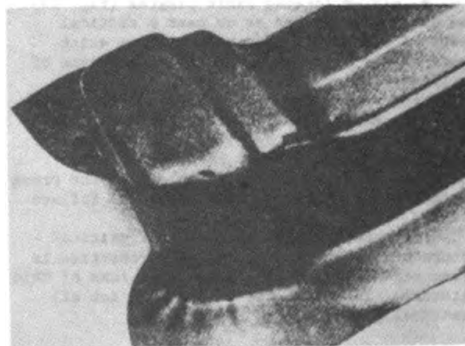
1979 Eldorado bumper draw splits with out-of-spec. G. M. 6187-M steel
